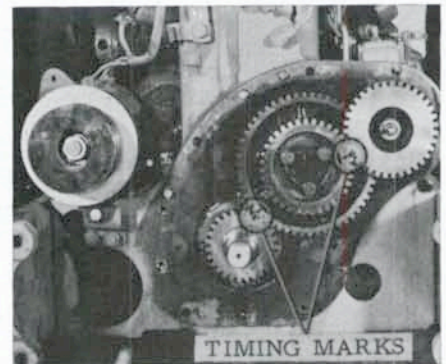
Diesel engine timing gears consist of camshaft and crankshaft gears and injection pump drive and driven gears. Timing marks should be aligned as shown.
